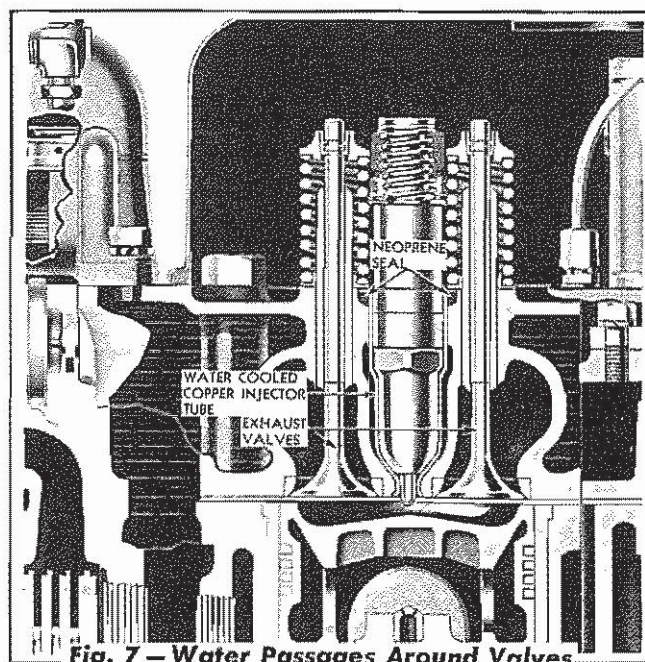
Water Passages Around Valves and Injector In Cylinder Head
